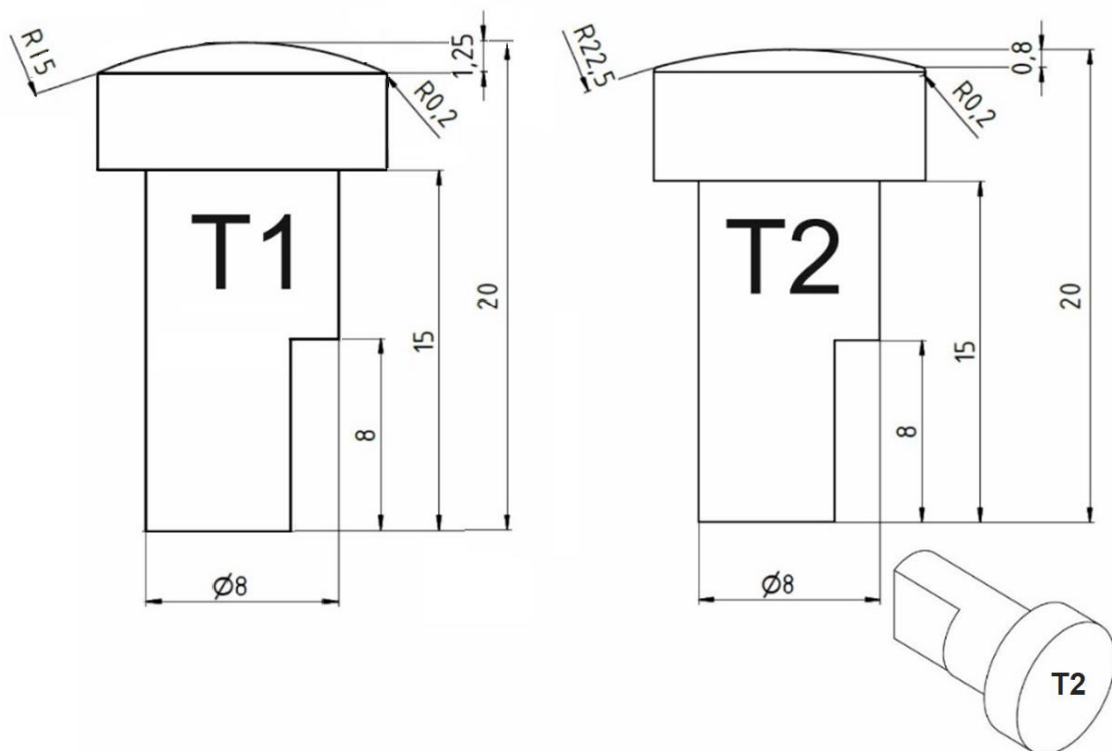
Details of tool geometries (all dimensions shown are in mm)
